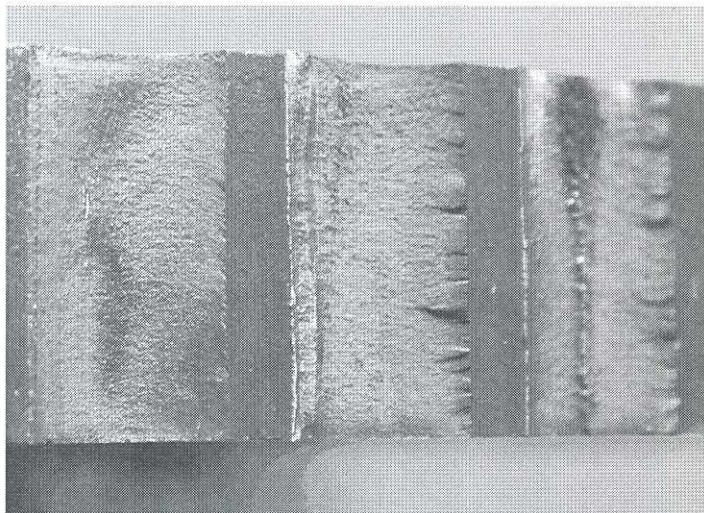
Ratchet marks and beach marks on the cam gear fractures, indicating origin of fracture in tooth drive side root radius.
